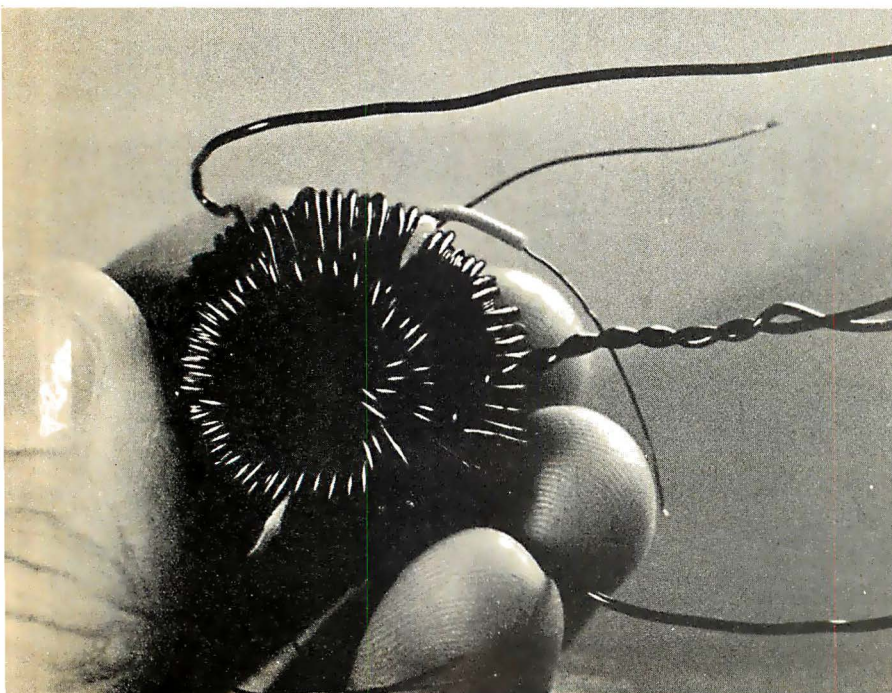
The completed transformer. The ends of all enameled wires should be cleaned of insulation before soldering.
